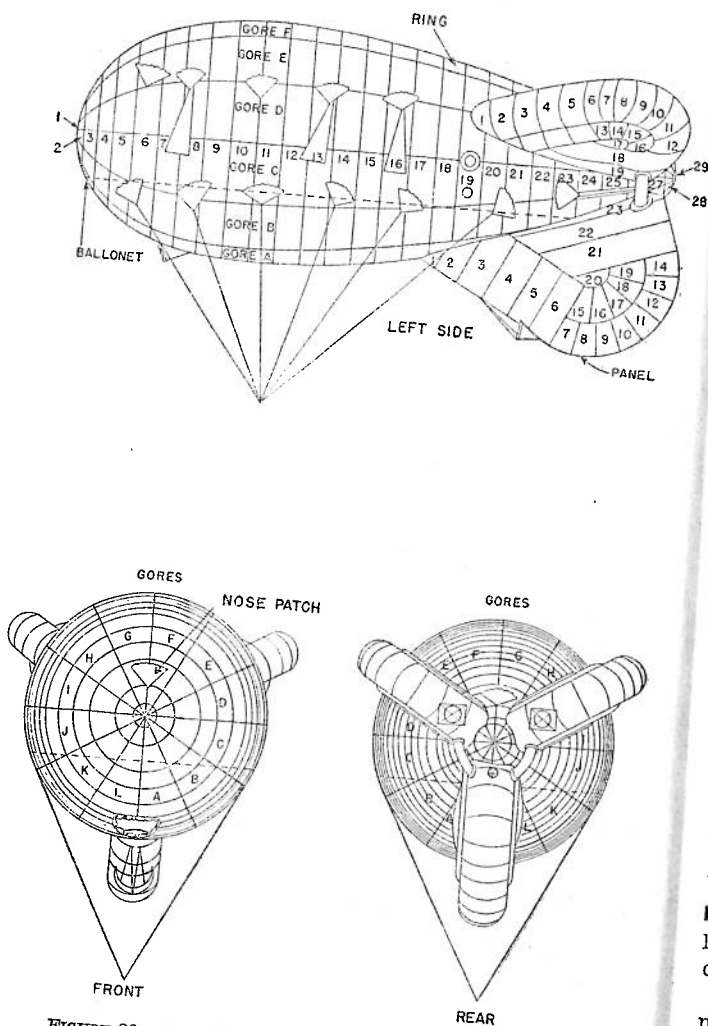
Balloon construction, D-8, 42-inch fabric.
